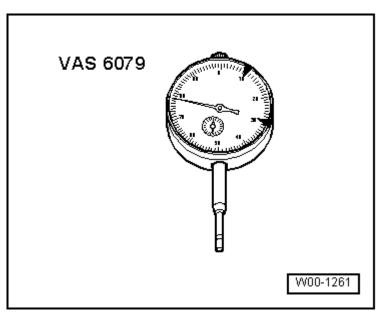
Dial Gauge 0-10 mm VAS 6079 Courtesy of AUDI OF AMERICA, LLC
